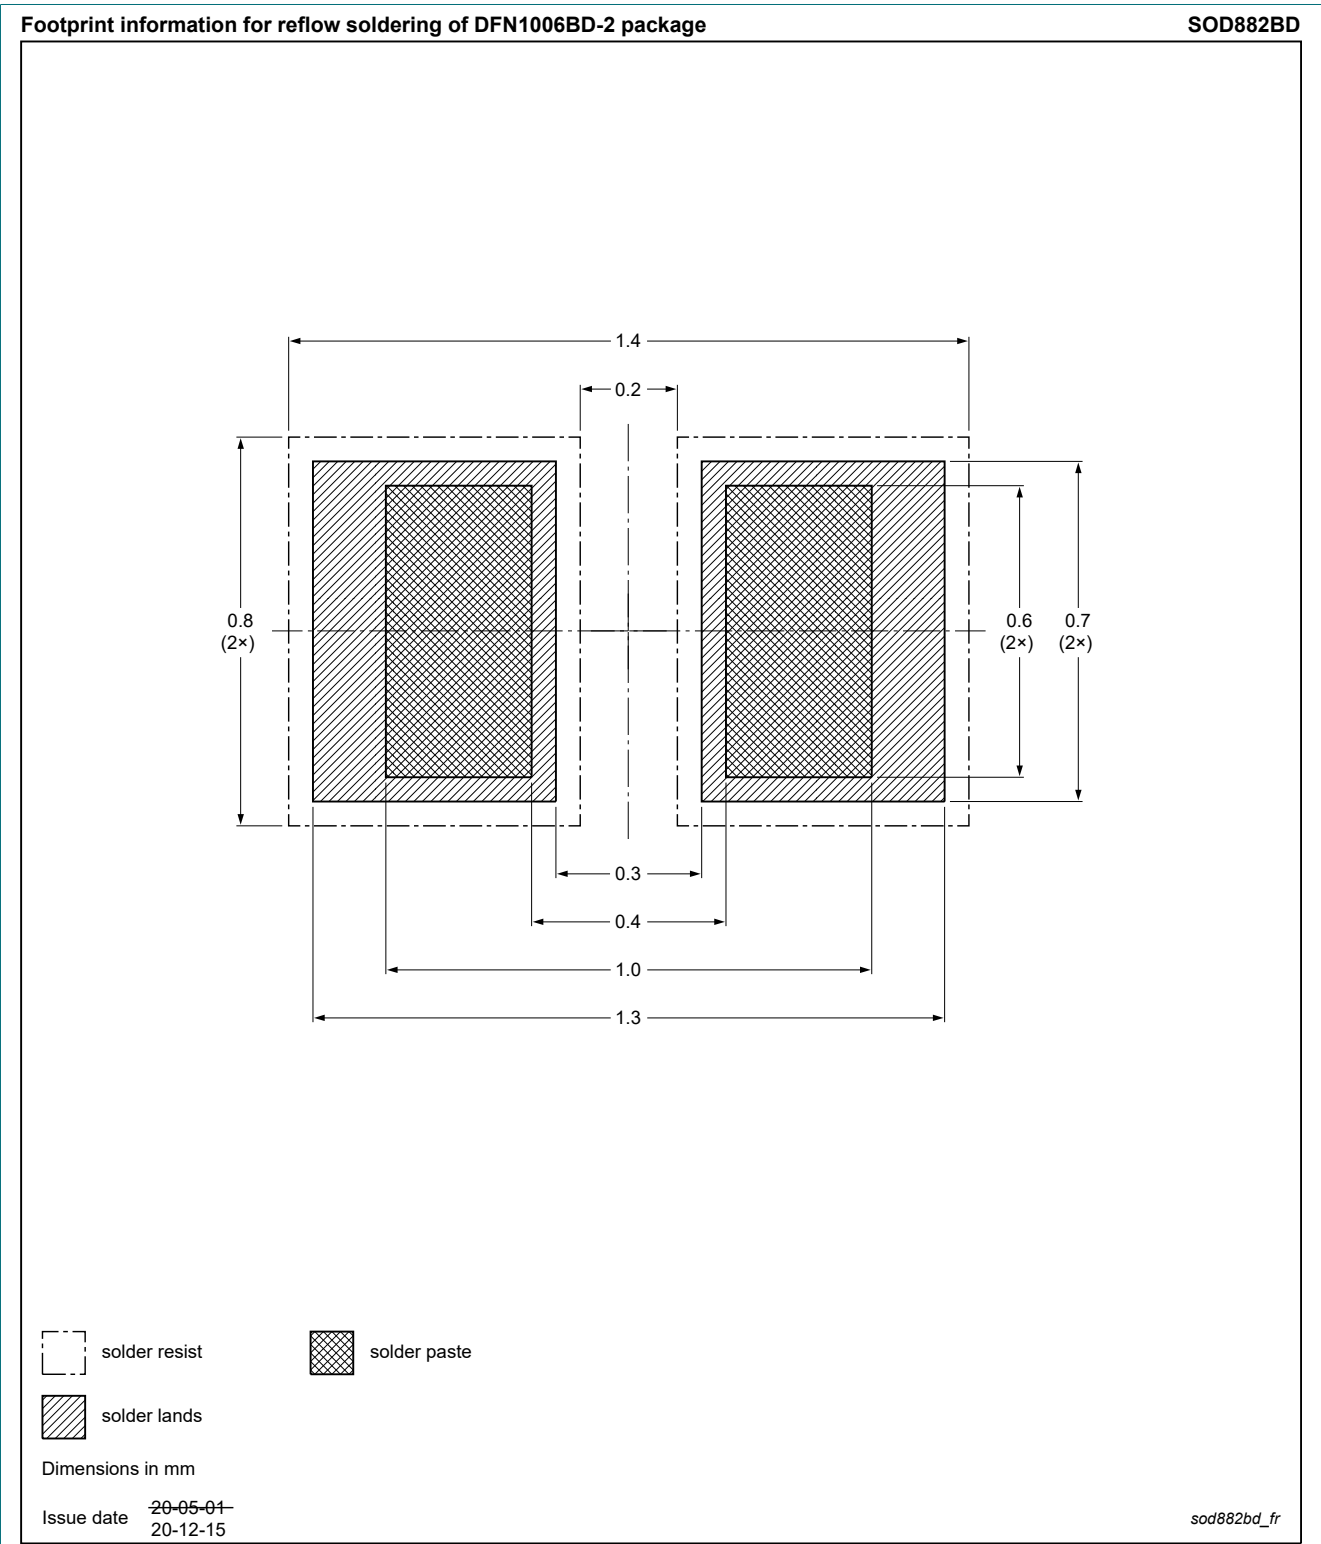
Reflow soldering footprint for DFN1006BD-2 (SOD882BD)
